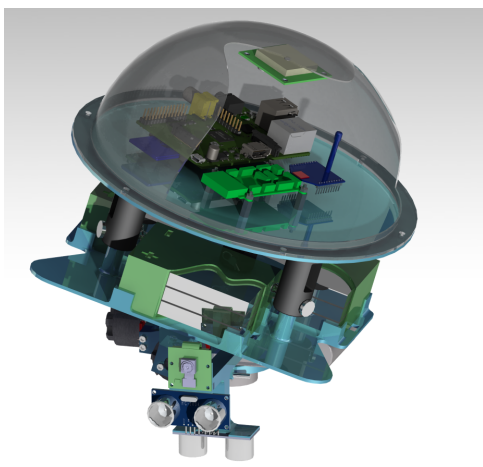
Computer drawing of the payload section, with the payload protection dome cut open.
